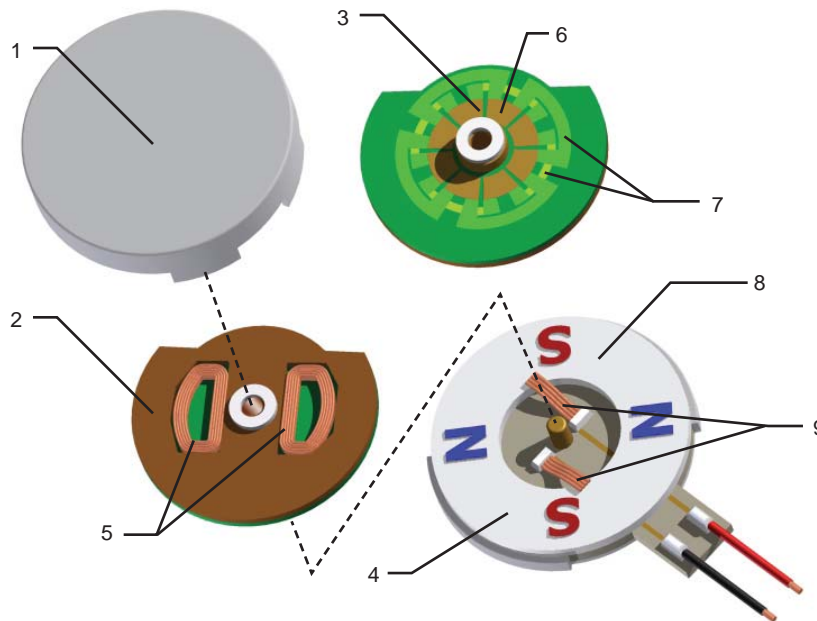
Brush coin-type vibration motor exploded view. (1) enclosure top, (2) rotor (view as mounted), (3) rotor (inverted view), (4) enclosure bottom, (5) coils, (6) commutation points, (7) alternating power supply circuits, (8) ring magnet (showing representative polar zones), (9) power supply brushes.
